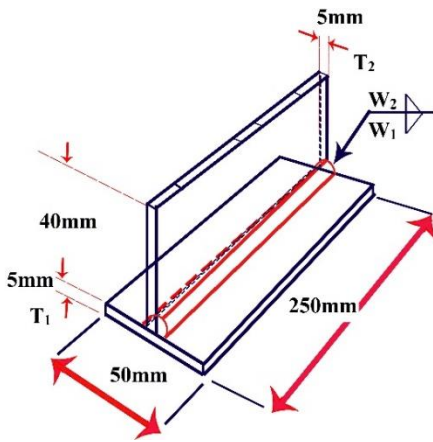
Size and dimensions in the welded piece. Fig 3. Joint of the joint for the sheet.
